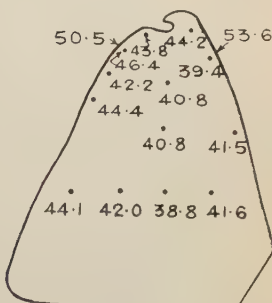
A.—Diamond Time-Hardness of Gear Tooth D.
